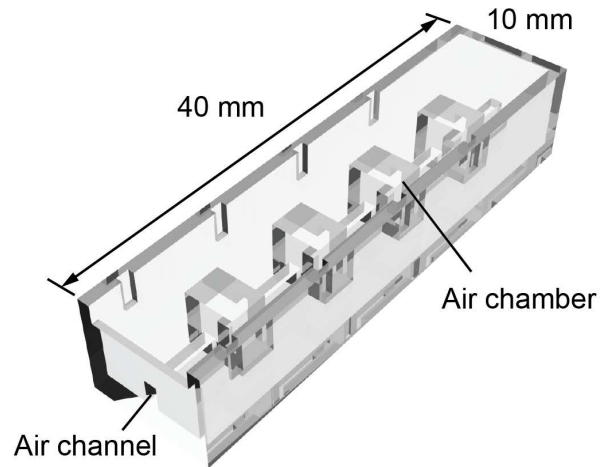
Schematic illustration of 3D printed mould to fabricate the soft robotic finger.
